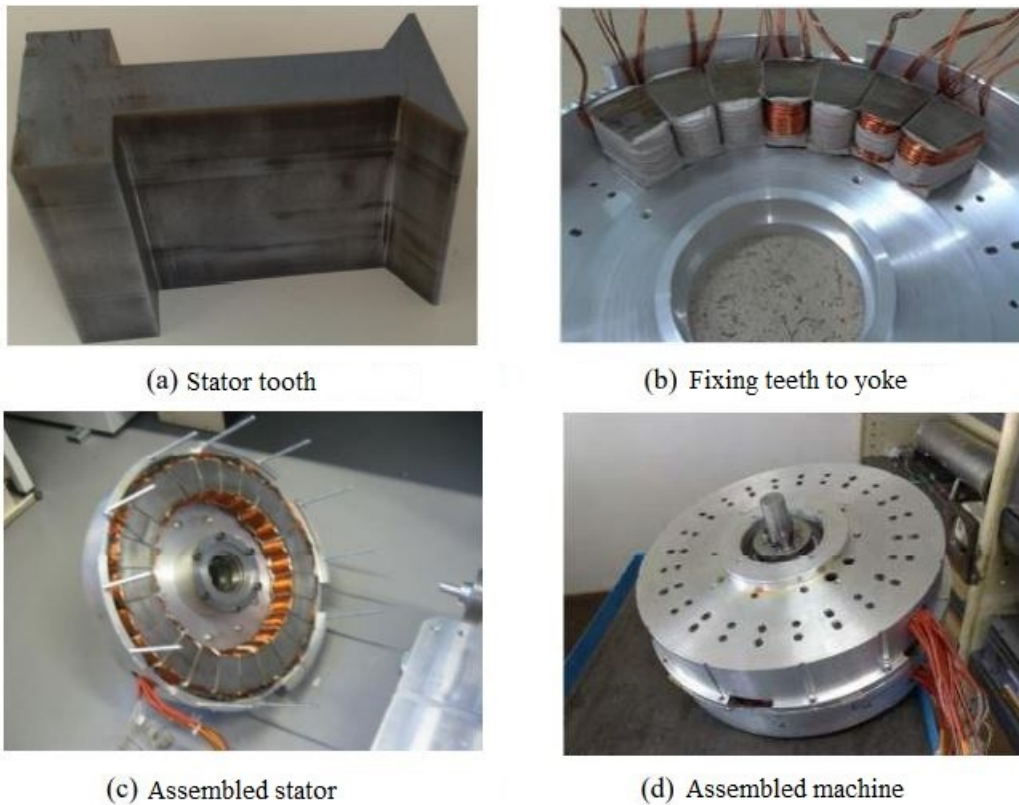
Stator assembly process of the surface mounted PM machine
